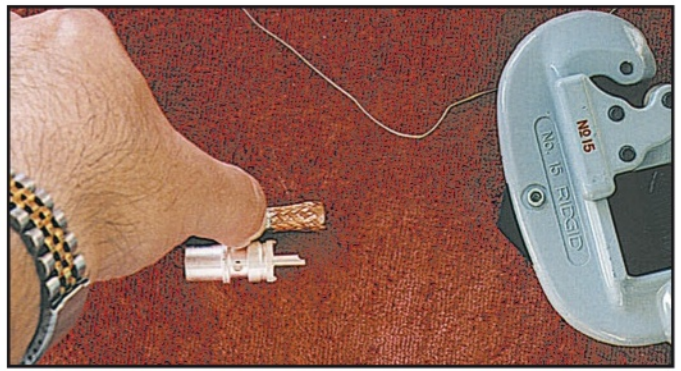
Again, my thumb indicates where to cut. The shield and center insulator will be cut so that the cable will fit into the connector body, and stop where the Teflon insulator joins the connector body.
